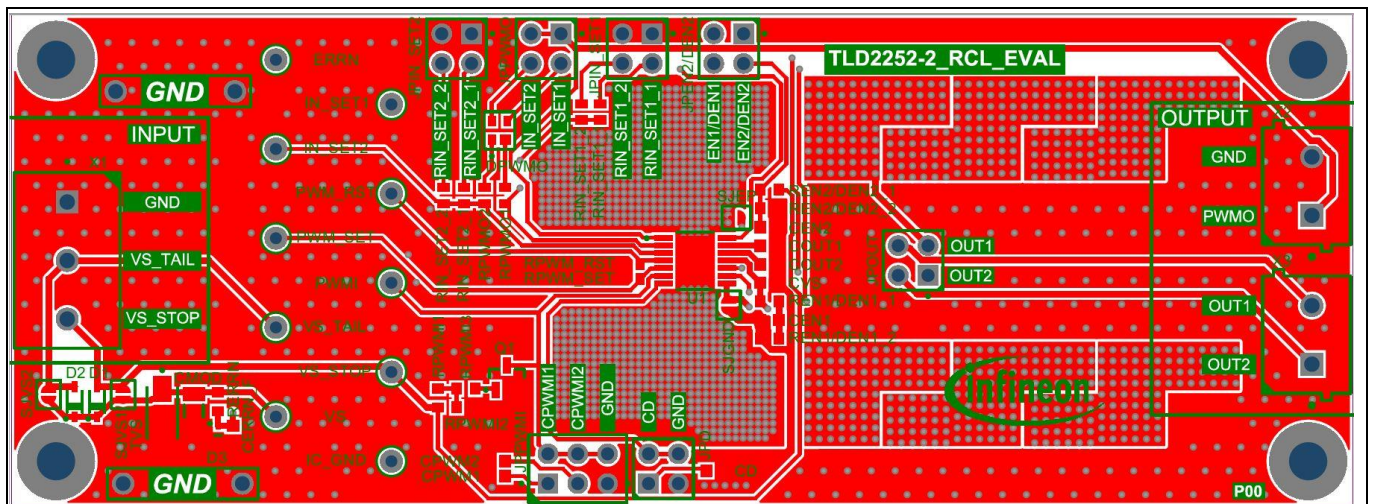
Layout of TLD2252-2_RCL_EVAL board – top layer
